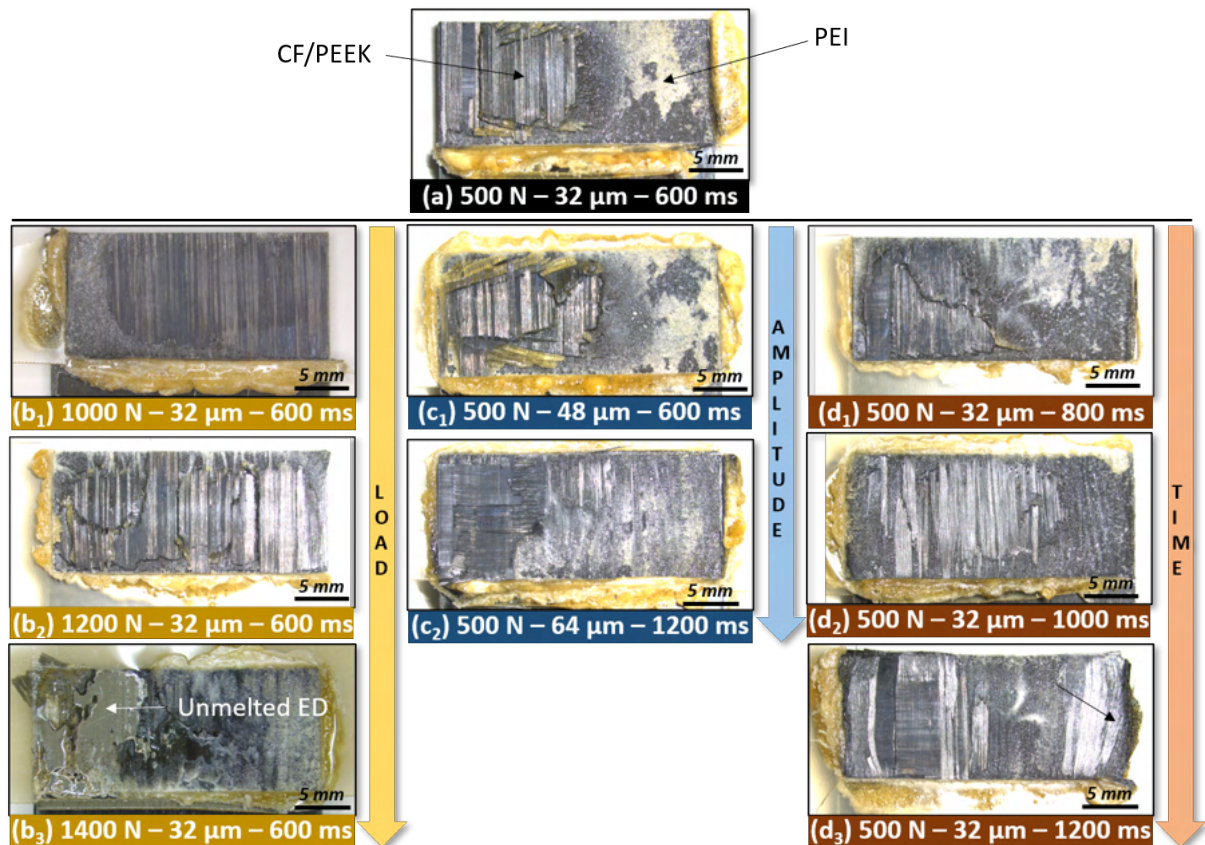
Interfacial fracture of welded specimens in several welding conditions
